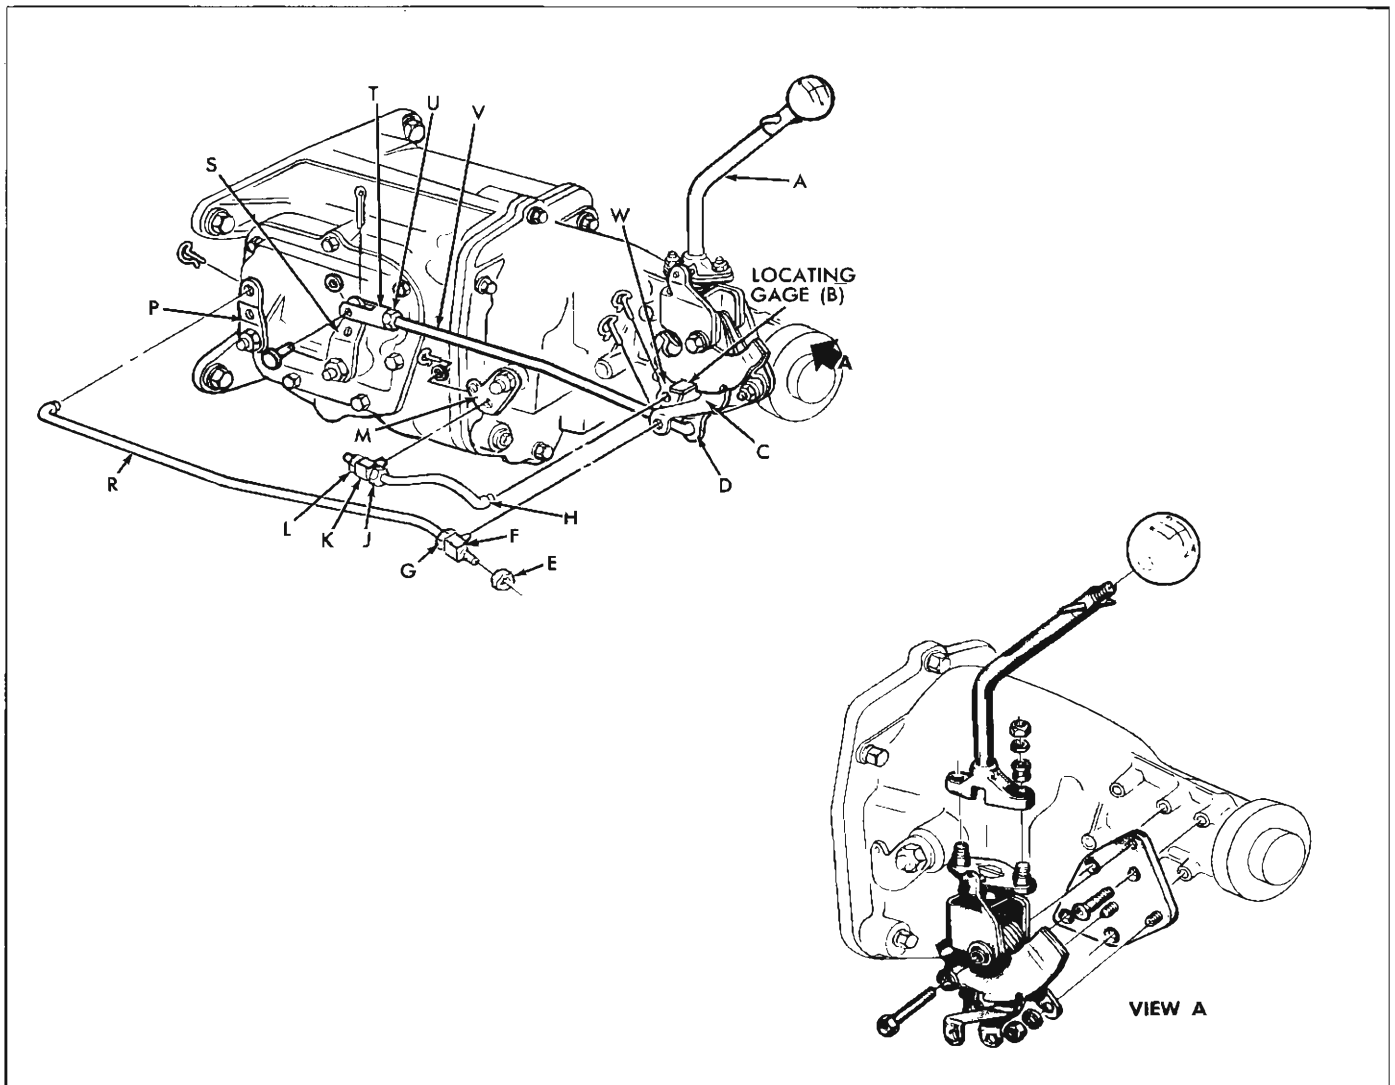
M—Four-Speed Transmission Gearshift Linkage (Chevrolet Shown)
